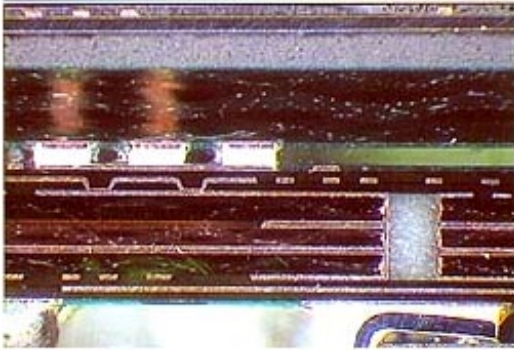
The SBU boards used in the Sony DCR-PC7 Camcorder folded out.
